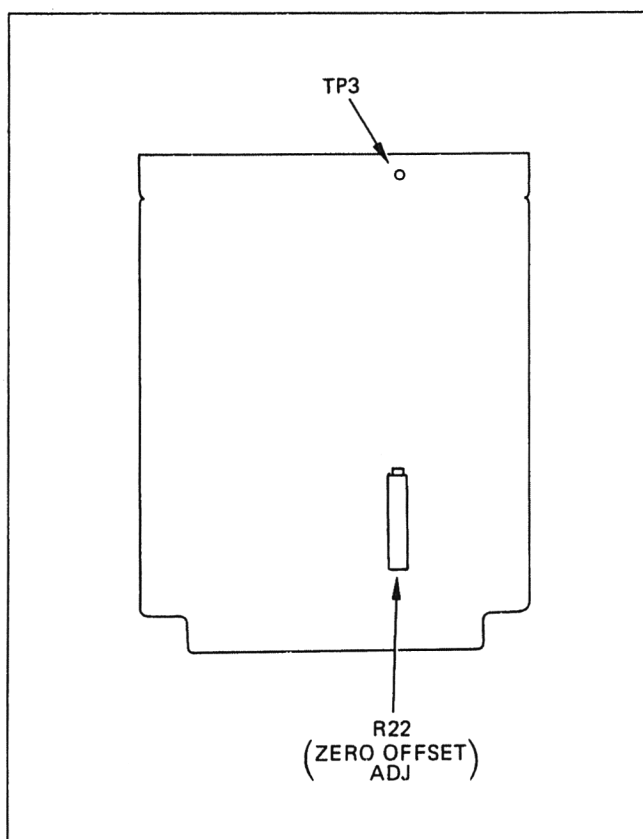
Trimmer Locations, Rectifier and Charge Regulator Assembly, A32
